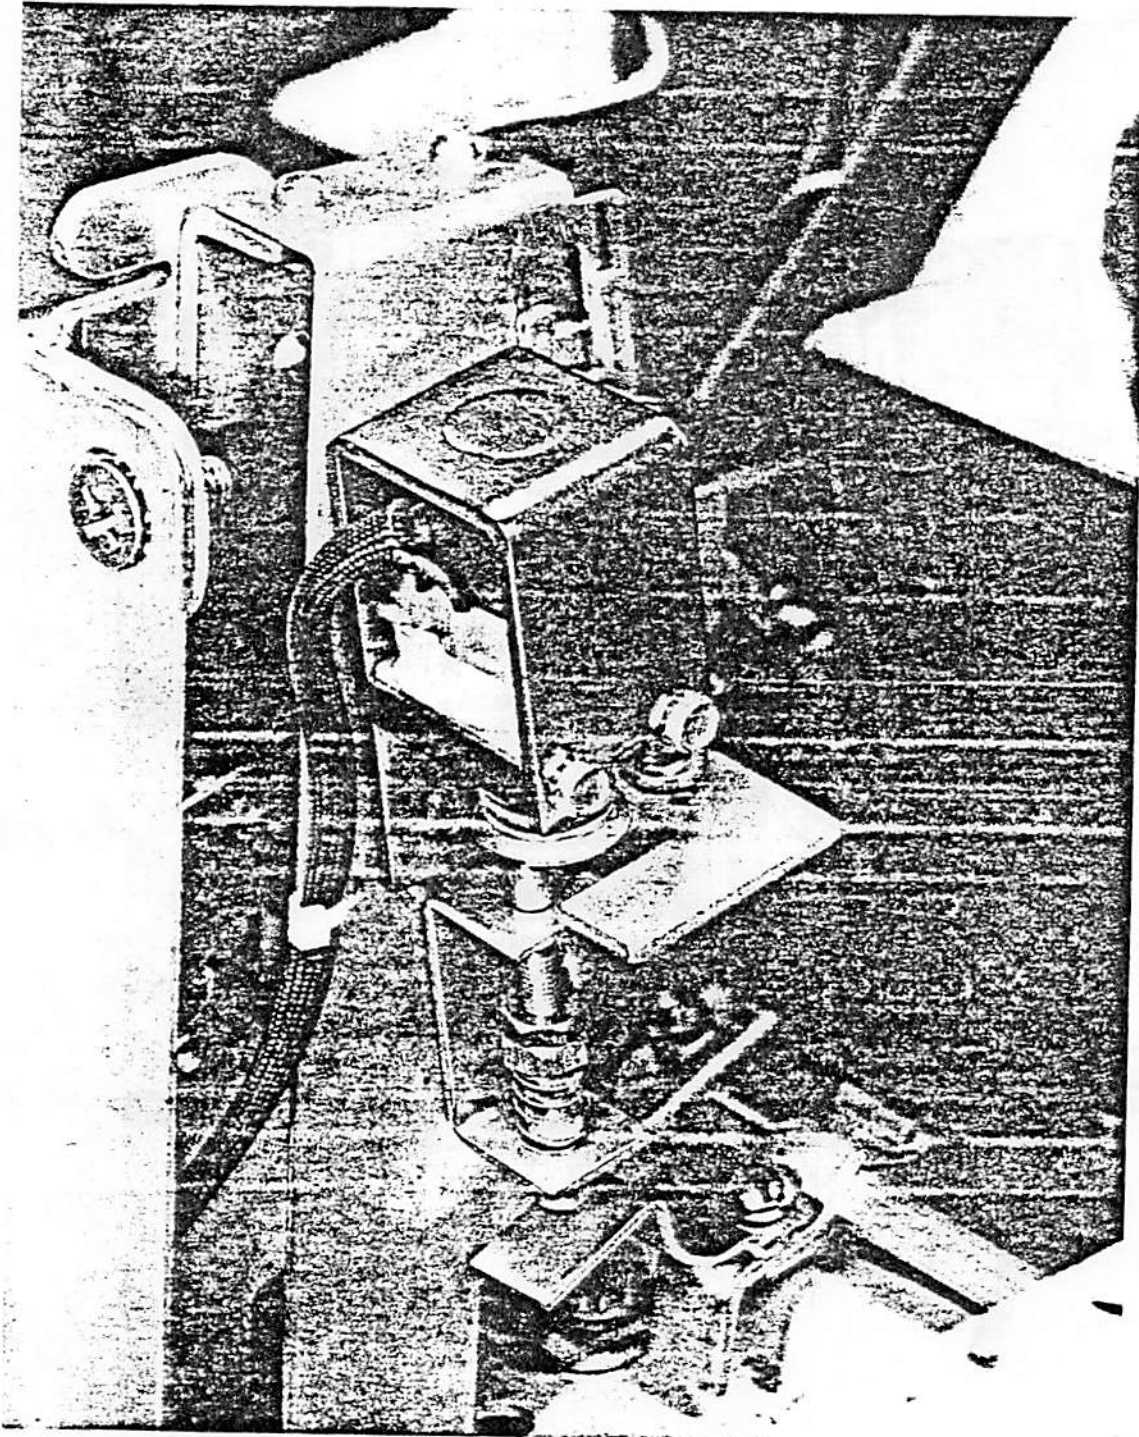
Right side view of operating mechanism showing mounting of flux shift trip device.
